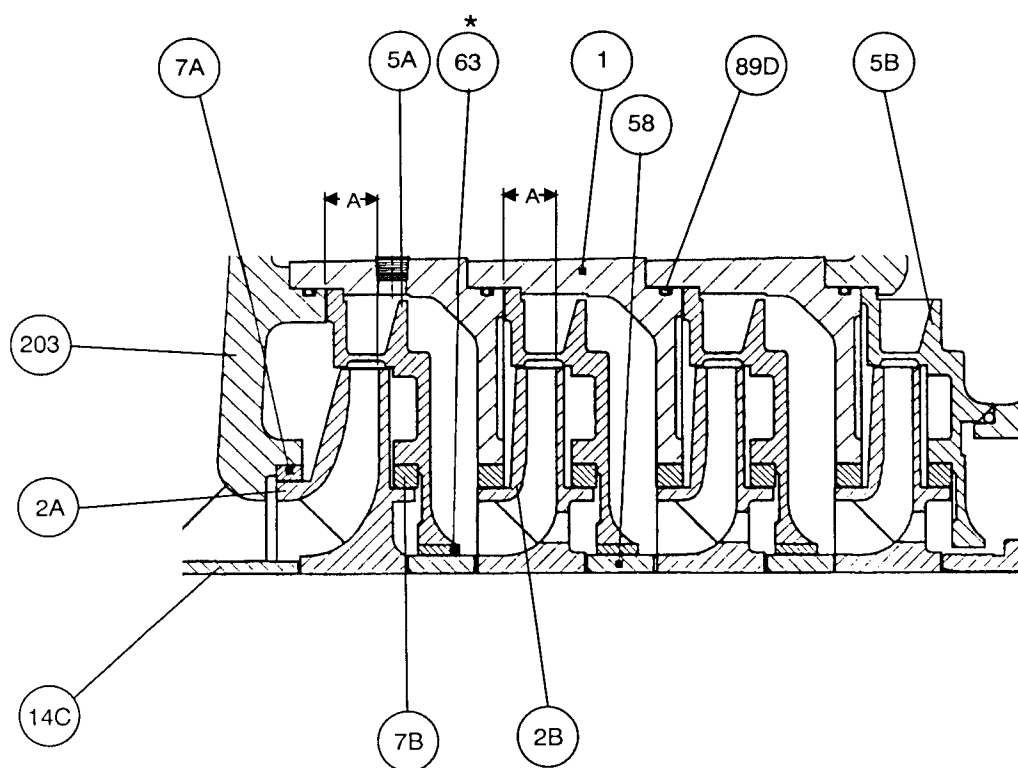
A. Axial Alignment of Rotor, WKM-50 and WKM-65
